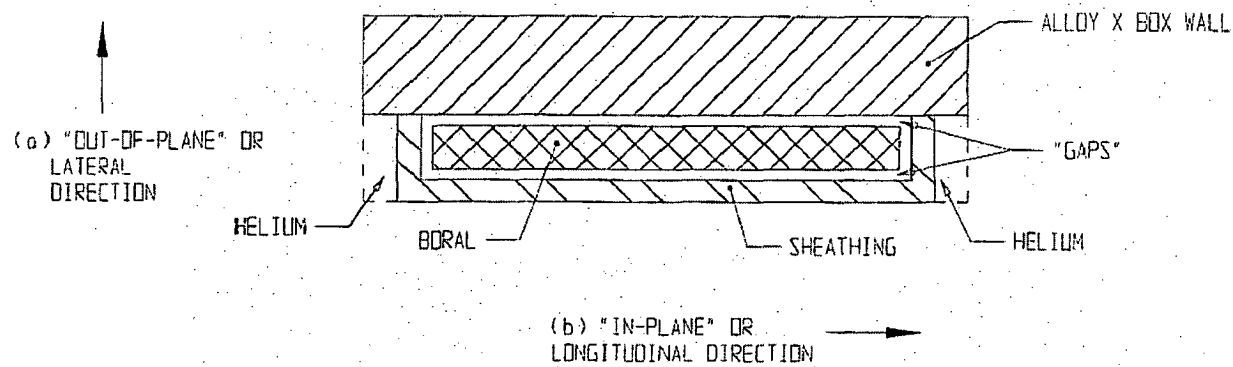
; "BOX WALL-BORAL-SHEATHING" SANDWICH
